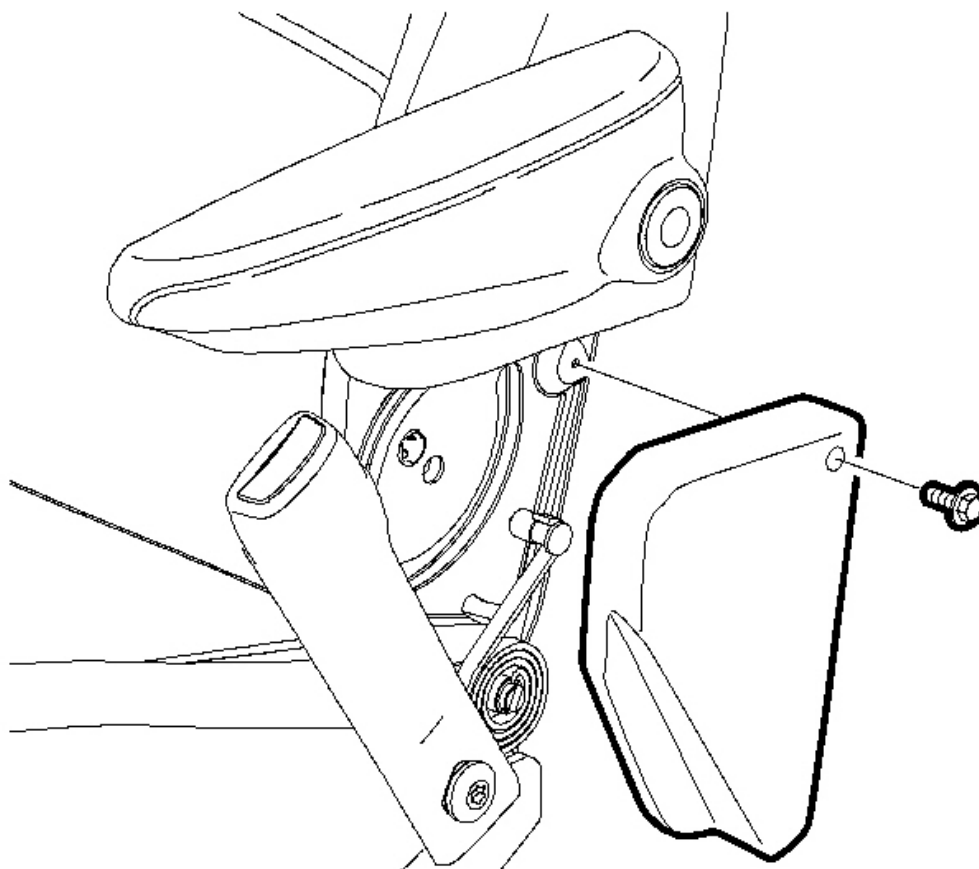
Removing/Installing Inboard Recliner Trim Panel
